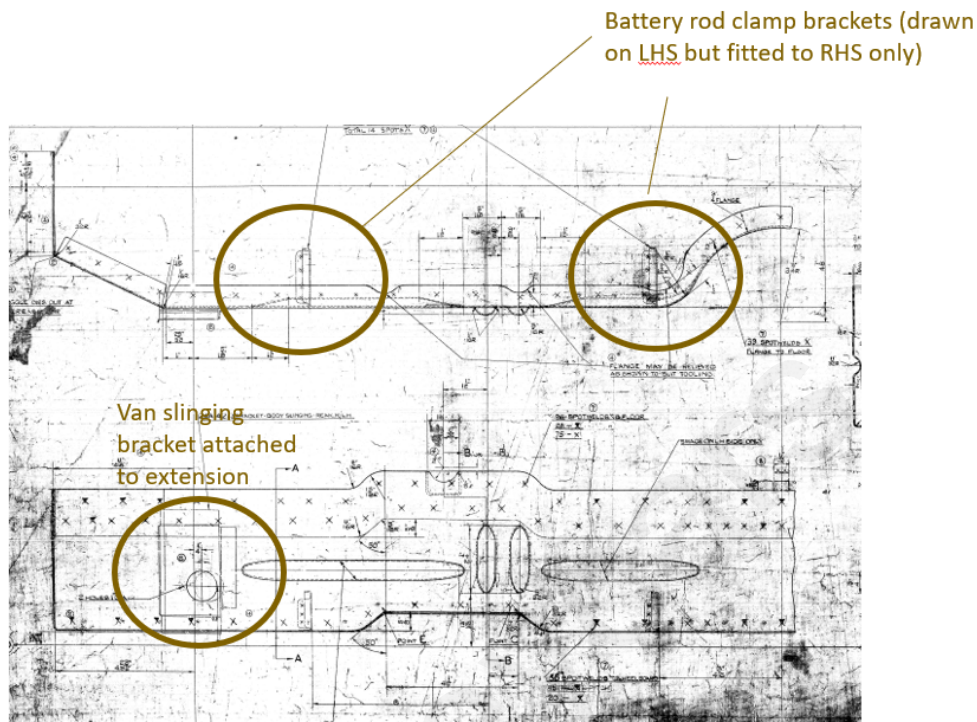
Floor Extension (one half shown), 14A9023.
